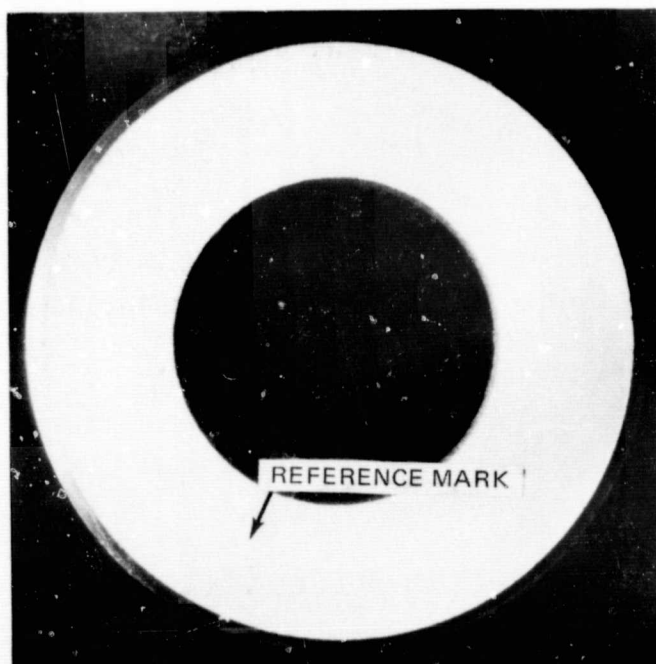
Condition of Hardface Seal Surface of Test Unit 3 Before Test (XP-83425)
